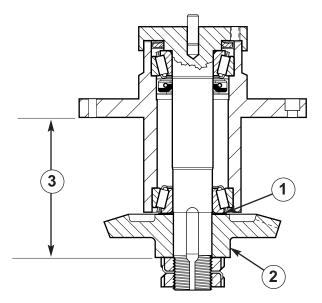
Check mounting distance and add shims so that distance measured with micrometer equals mounting distance. (1) Shims, (2) Large Gear, (3) 2.500" (63.5 mm) plus dimension etched on large gear
